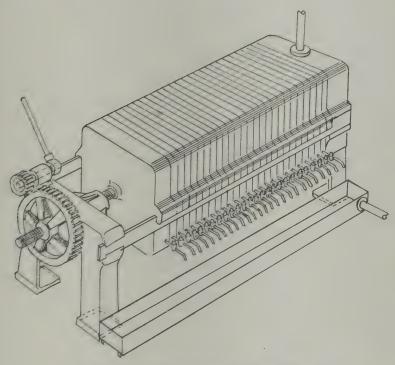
ASSEMBLED FILTER-PRESS.
